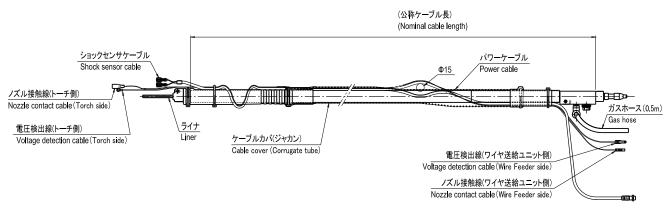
Outline drawing of the coaxial power cable(L-11405)
